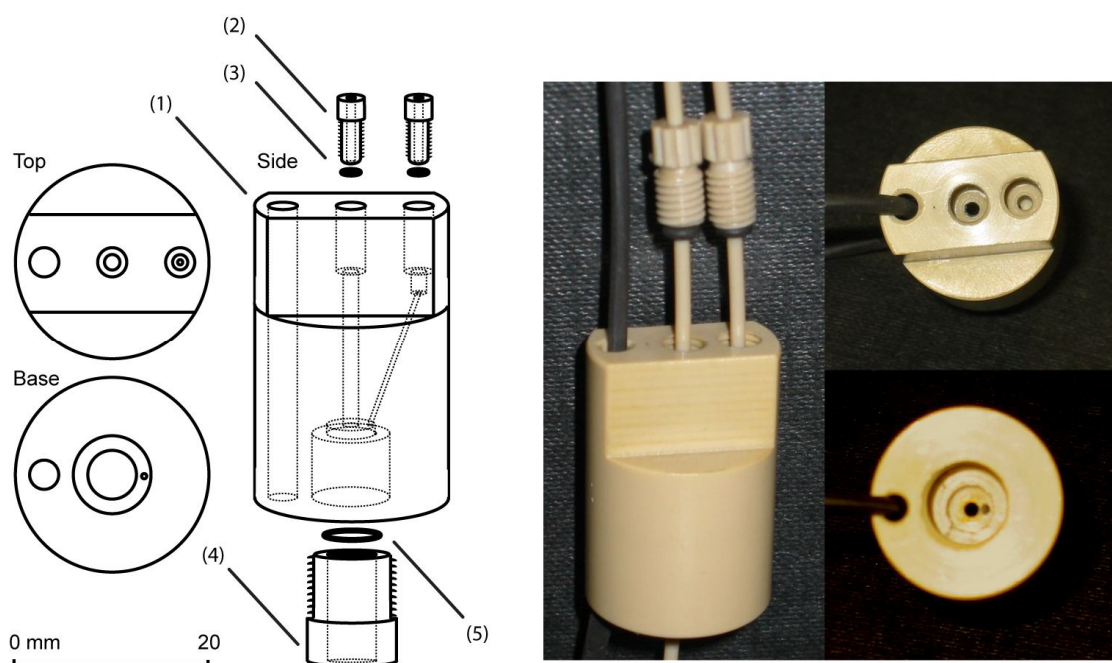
(Left) scale drawing, and (right) photographs of the flowcell headpiece assembly. (1) headpiece; (2) inlet and outlet pipe bushes; (3), (5) O-rings; (4) NMR tube retaining bush. The left part of the composite photograph shows the inlet and outlet pipes and their respective bushes and O-rings, together with the liquid sensor cable, the latter and the inlet pipe running continuously through the headpiece. The top right shows the top view, and the bottom right the bottom view, of the headpiece.
